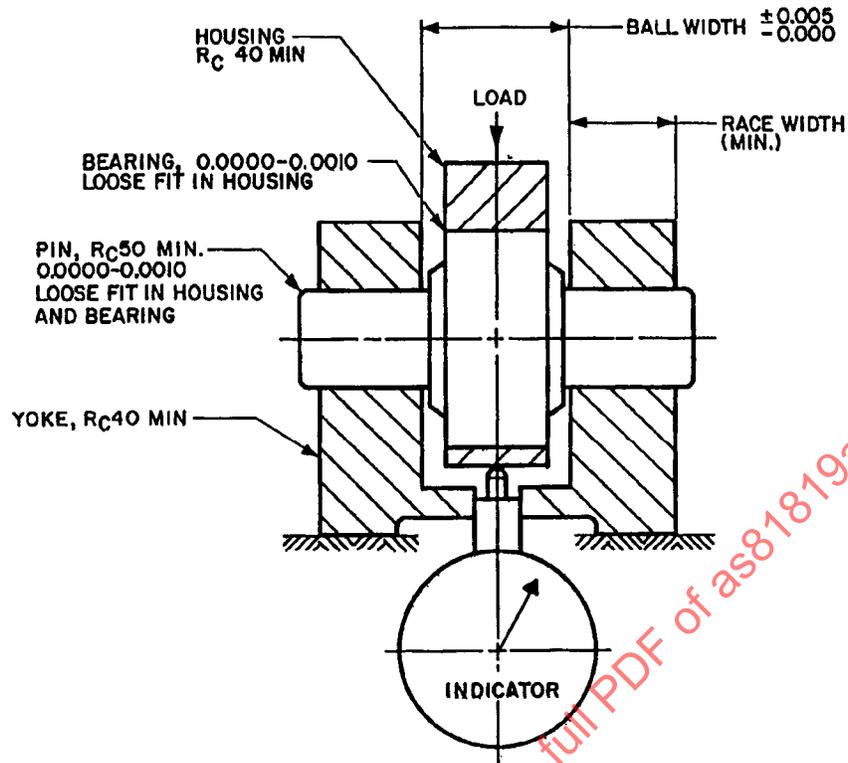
RADIAL STATIC TEST LOAD TEST FIXTURE
